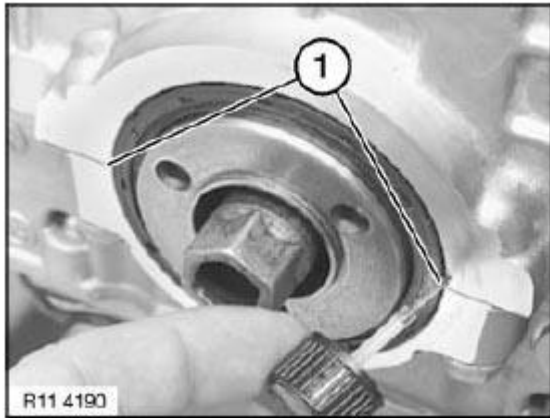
Inserting Brush Into Grooves On Crankshaft Seal
